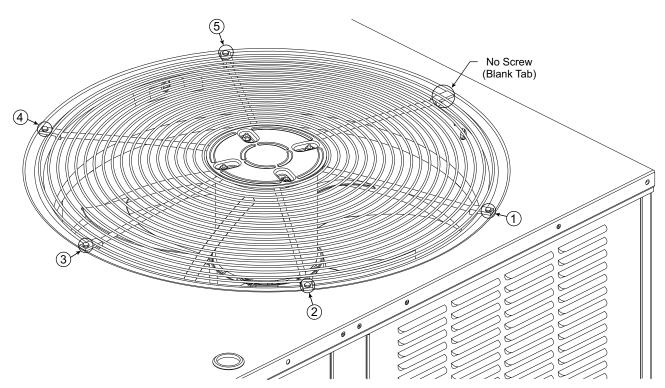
Condenser-Fan Assembly — Screw Pattern Sequence
